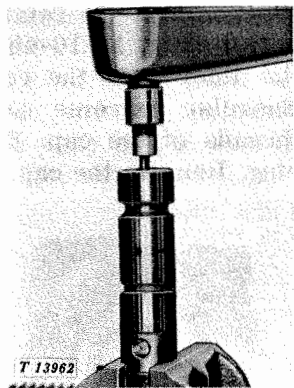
Tightening Delivery Valve Retaining Screw
